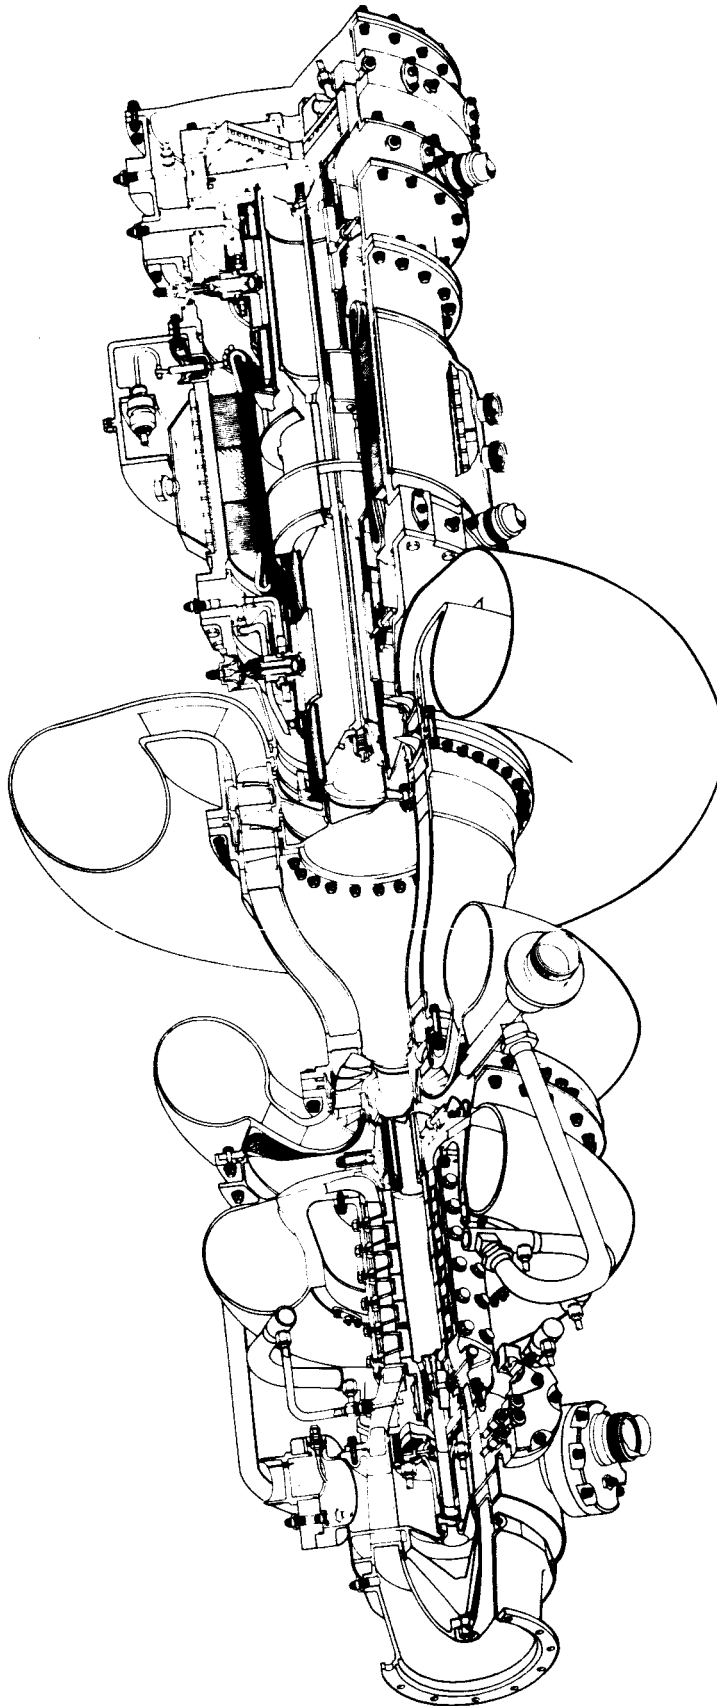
Brayton-Cycle Turbomachinery Employing Gas Bearings
